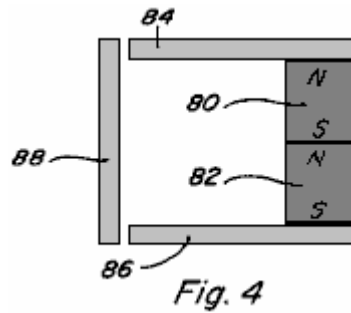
is a side view of two magnetic members arranged in series between pole pieces;
